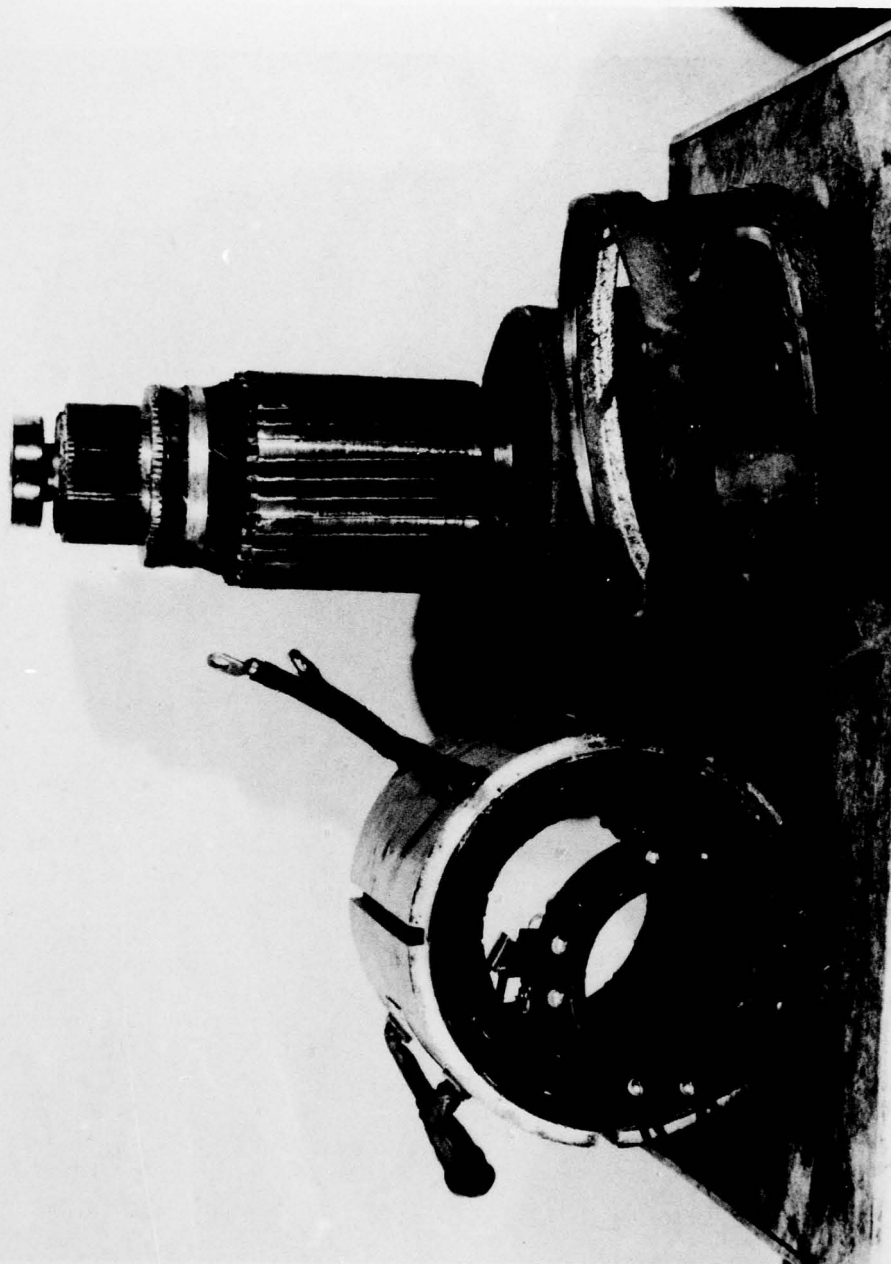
Overall view of motor damage caused by disintegration of soft solder joints.
